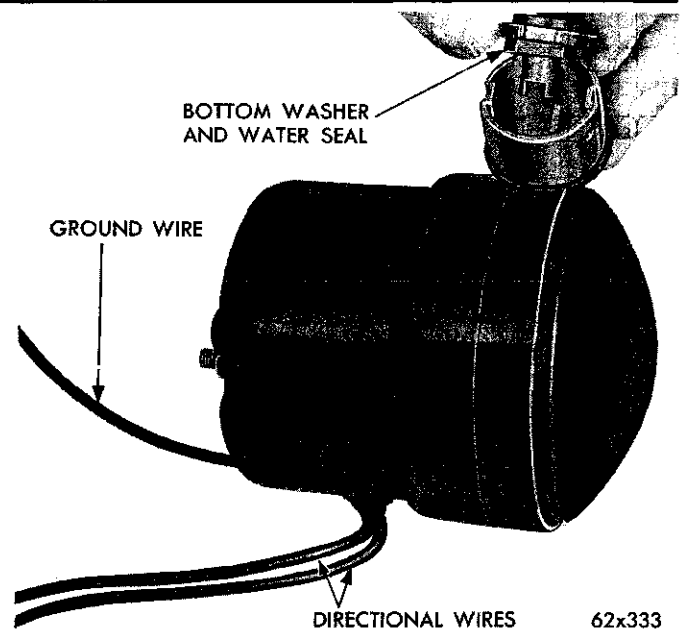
Removing Bottom Insulator and Water Seal Washer
